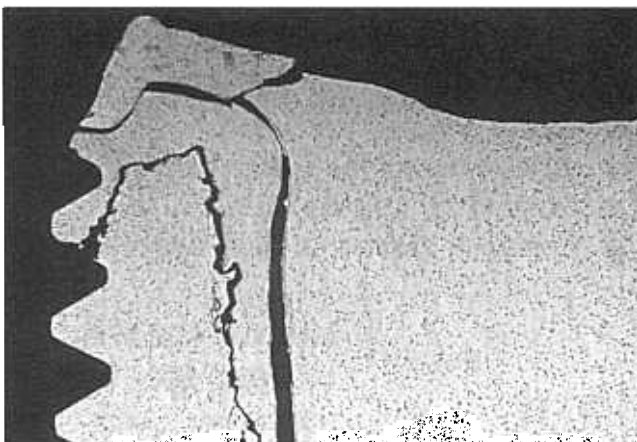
Path of segregated inclusions & bursts throughout threaded section of fastener (magnification 15X).
